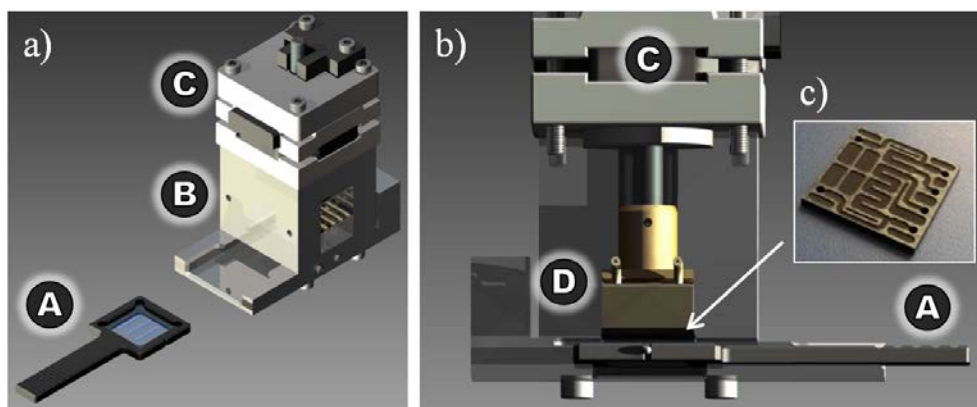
System fluidics: a) mounted chip (A) to be manually inserted into chip bay (B). b) Cross section of chip bay with linear motor (C) pressing piston (D) on chip surface. c) Laser ablated EPDM gasket.
